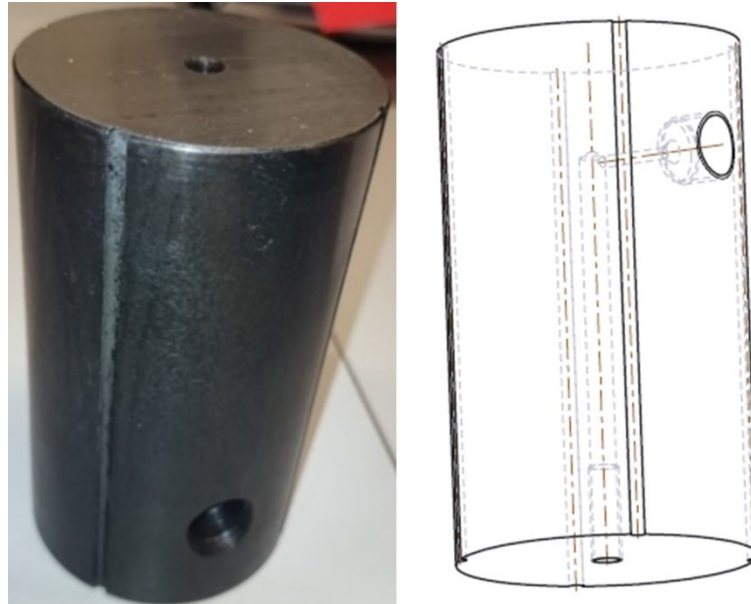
Axial platen with internal conduit to transfer pressure into the specimen
